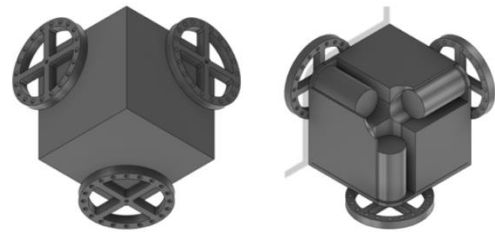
, showing two/three-dimensional IP test bed CAD model (within Fusion360)
